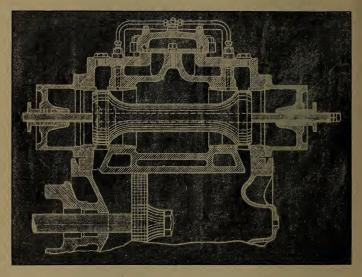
Piston Valve and Arrangement of Ports in Steam Chest.
